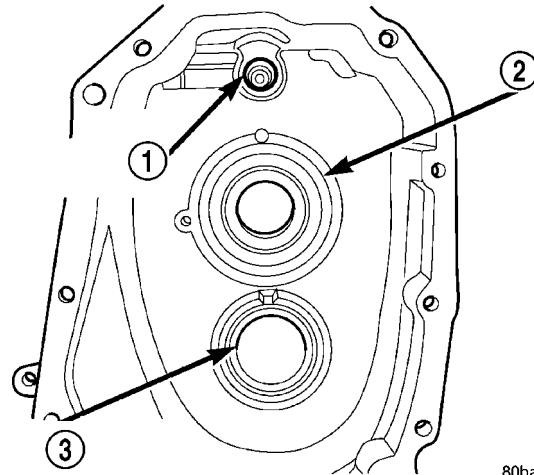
INPUT SHAFT AND COUNTERSHAFT BEARING
